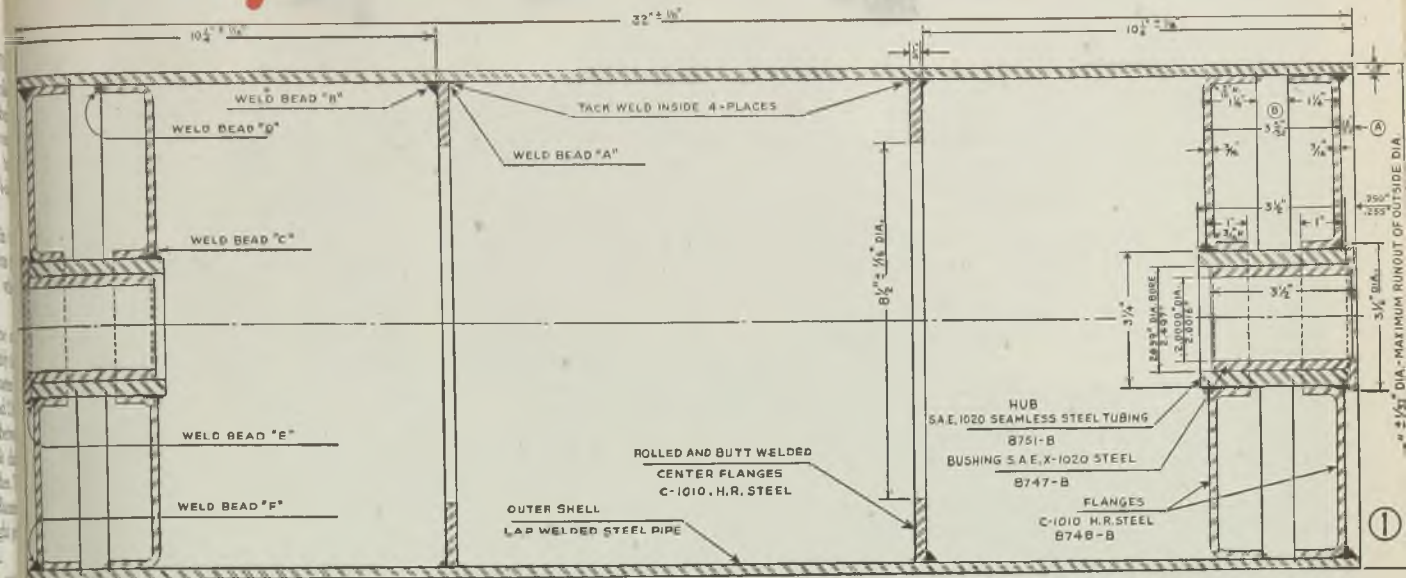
Cross section of built-up roller. Sequence of welds is indicated here as well as some of principal dimensions and tolerances
